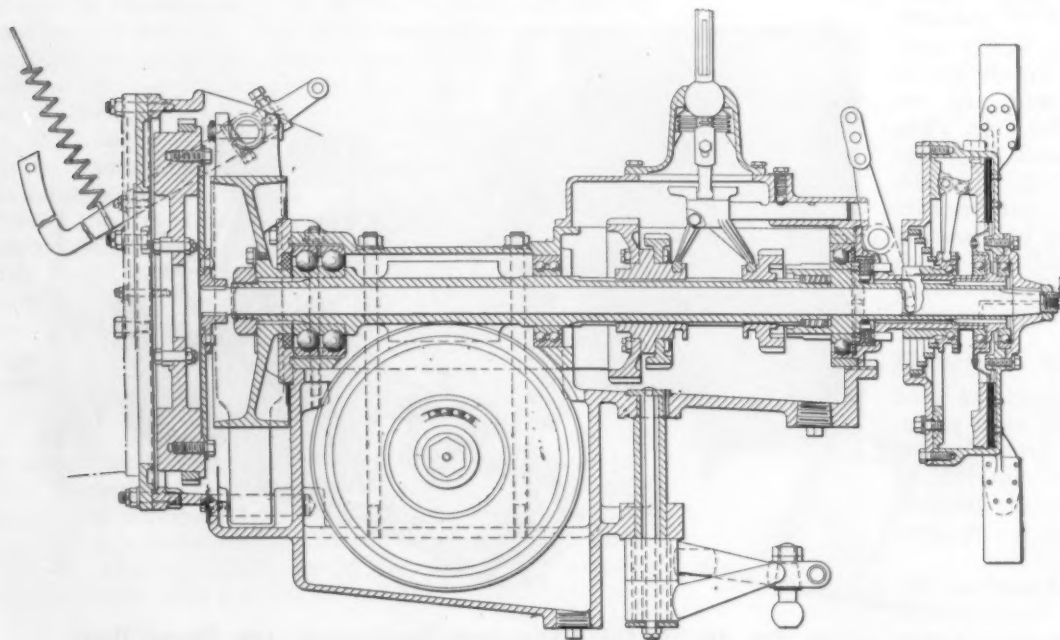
HEALEY-AEROMARINE CLUTCH, GEARSET, AND WORM DRIVE-GEARS
